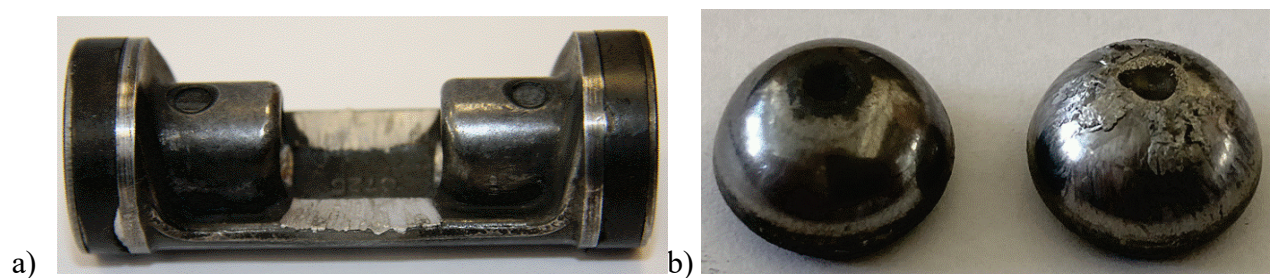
a) Surface damaging for the piston and lubricating rings, b) Different rate of surface damaging for the tappets
